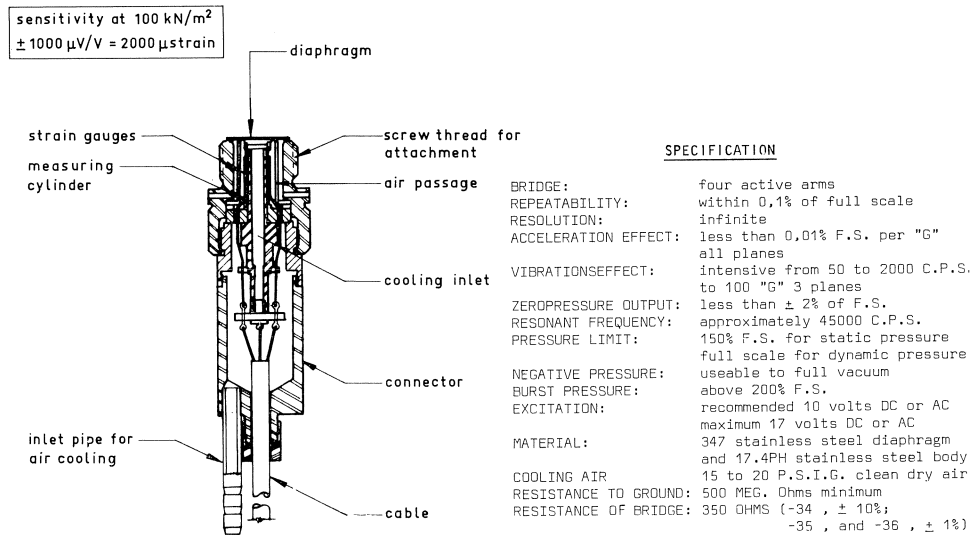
Section through "American Standard, model 141" pressure transducer.
